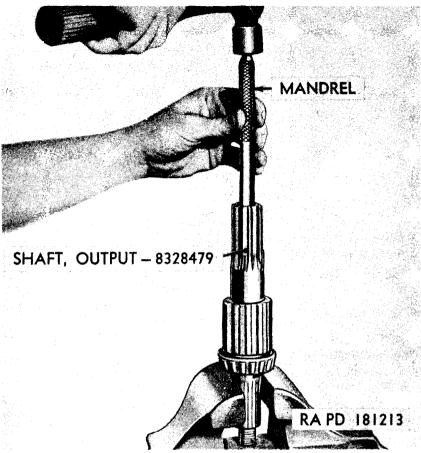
Seating bushing type pilot bearing in transfer rear axle output shaft.
